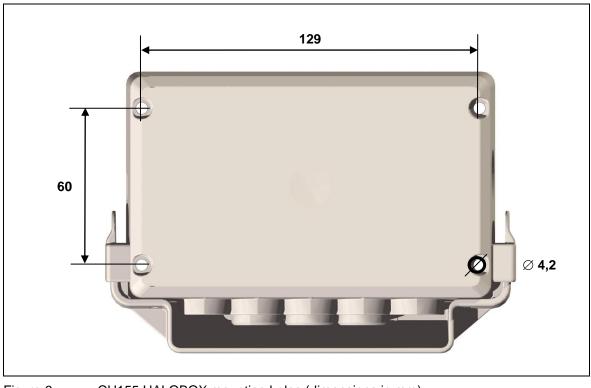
CU155 HALOBOX mounting holes (dimensions in mm)
